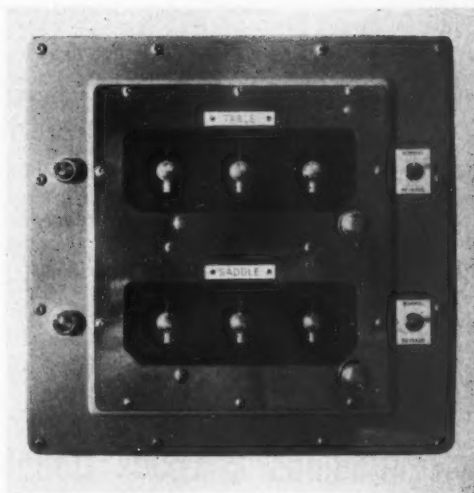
Panel for the new A.E.I. position indicating equipment for machine tools, whereby movements of a table or other sliding element are shown directly by pointers on dials
